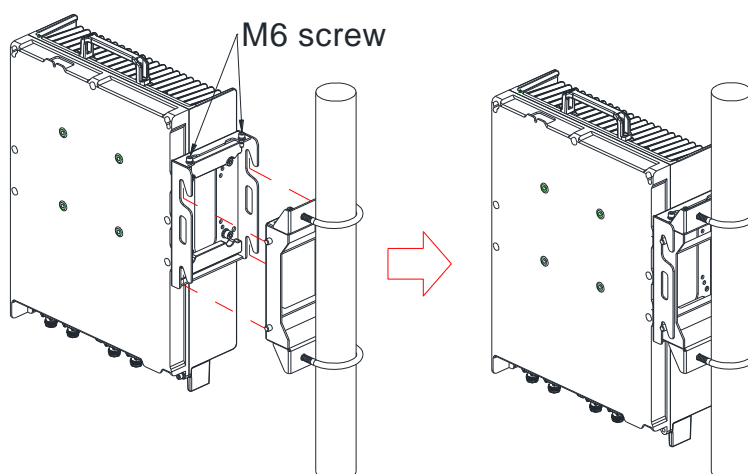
Fix RRU on Pole, Blade Mount
